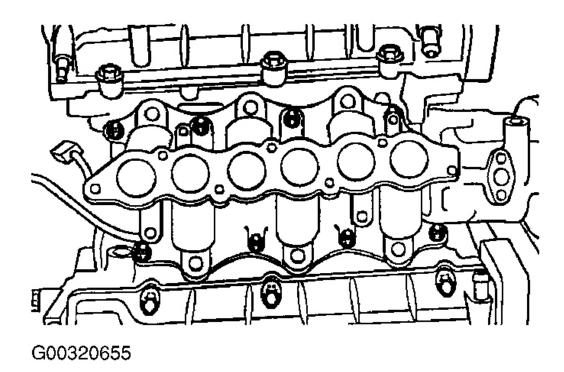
Illustrating Intake Manifold Courtesy of KIA MOTORS AMERICA, INC.
